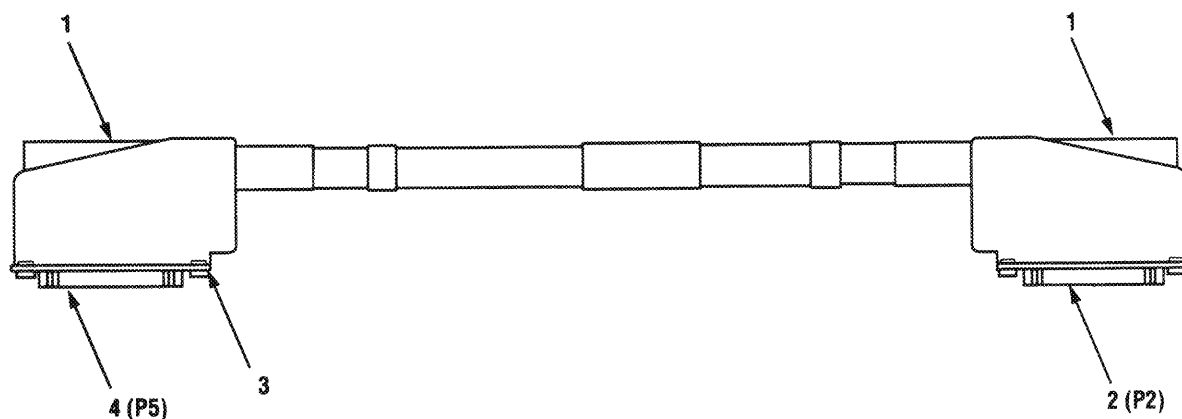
Cable Assembly W33 (3-94304.0000//B)
